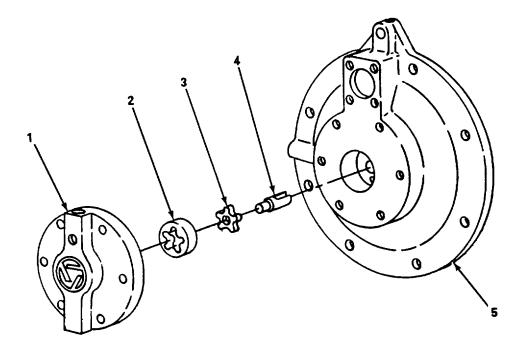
Compressor Bearing Carrier and Oil Pump, Repair.
